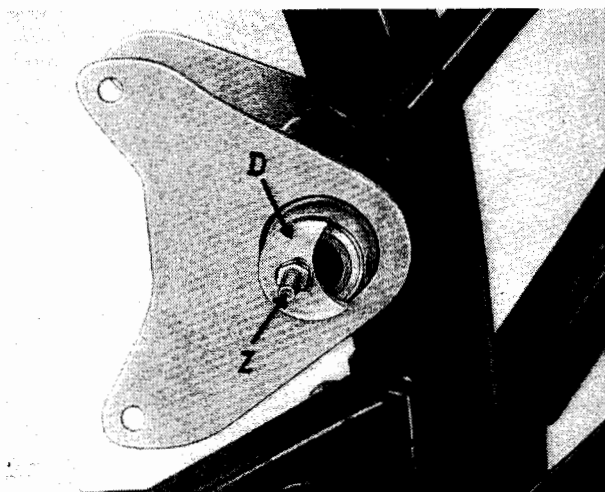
Engine mounting plates axially compressed by thrust ring (D) and draw-in bolt (Z) M 6
